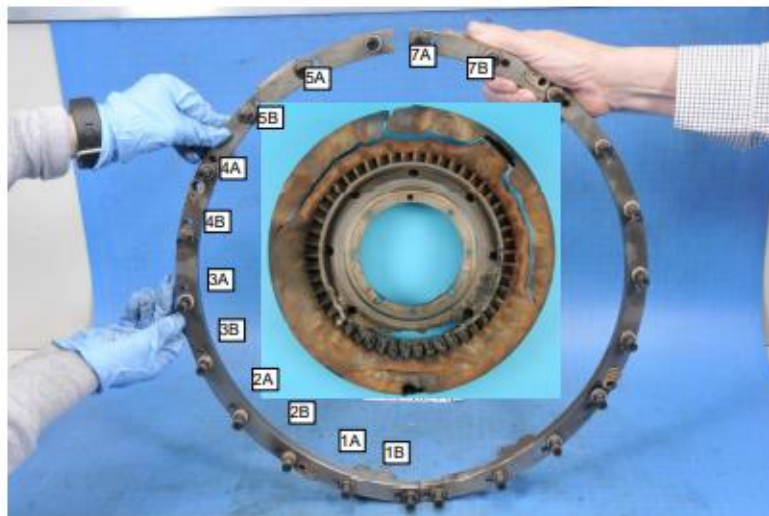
The fuel nozzle Designator Locations on the Engine (FLA).
